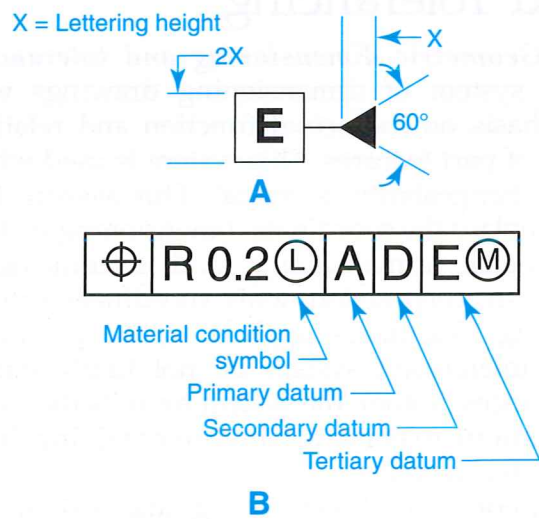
A—The elements making up a datum feature symbol. B—Datum reference letters are given in the desired order of precedence in the feature control frame. (American Society of Mechanical Engineers)
